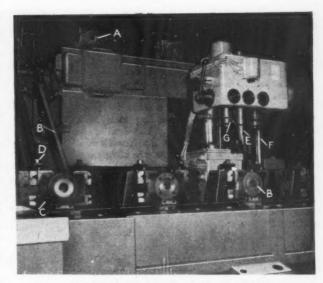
View from the Starting End of the Transfer Machine for Valve Bodies
